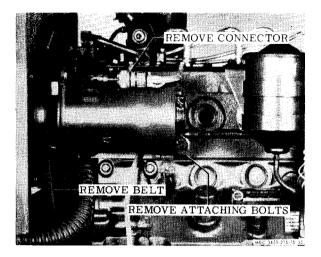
Generator assembly and mounting bracket, removal and installation.
